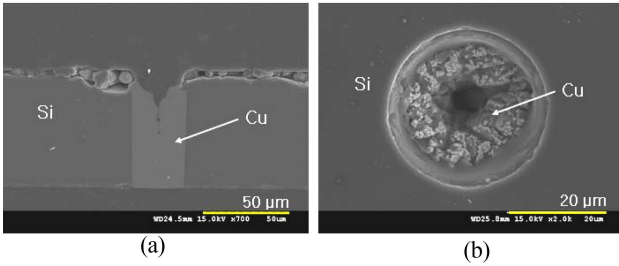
Defects in a Cu-plug; (a) cross section and (b) top view.
